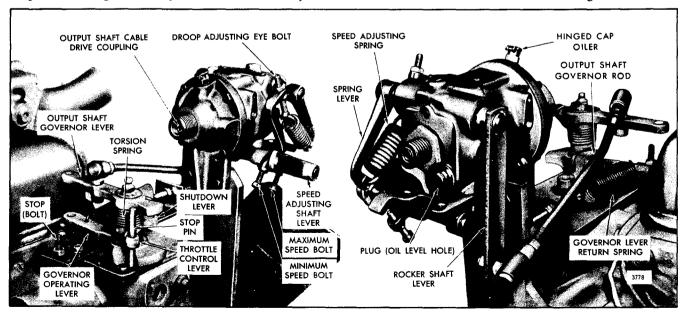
Flexible Shaft Driven Output Shaft Governor and Linkage
